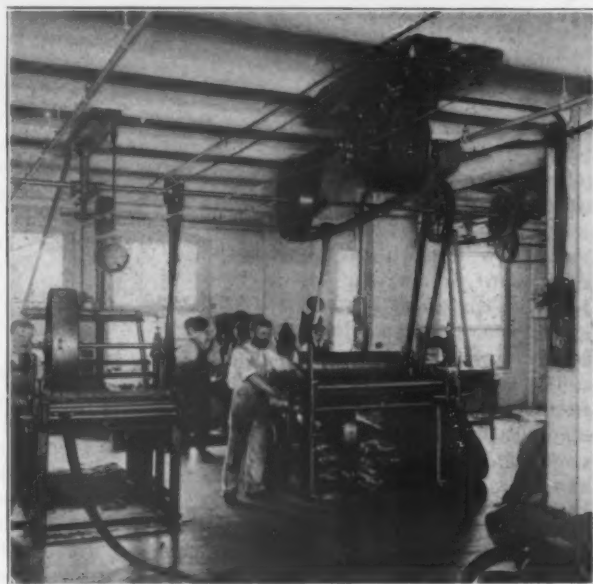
Opposite View of the Trimming and Winding Machines.
